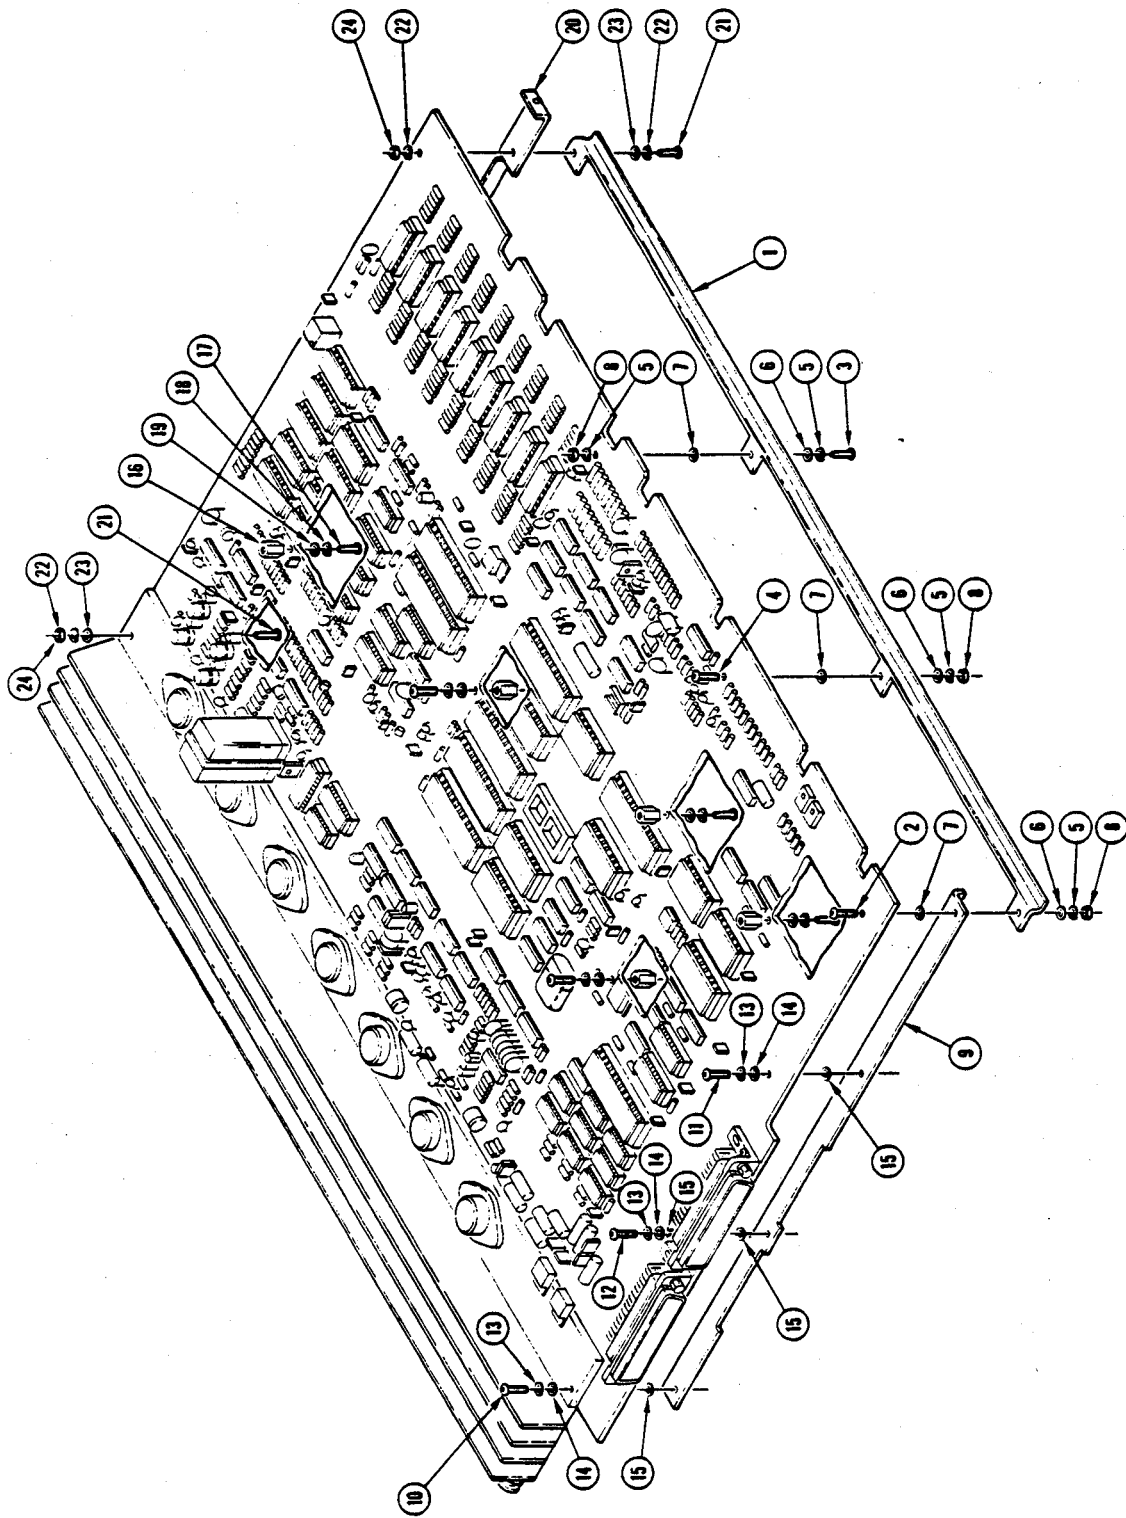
Drive Formatter Printed Wiring Board Assembly (Exploded View)
